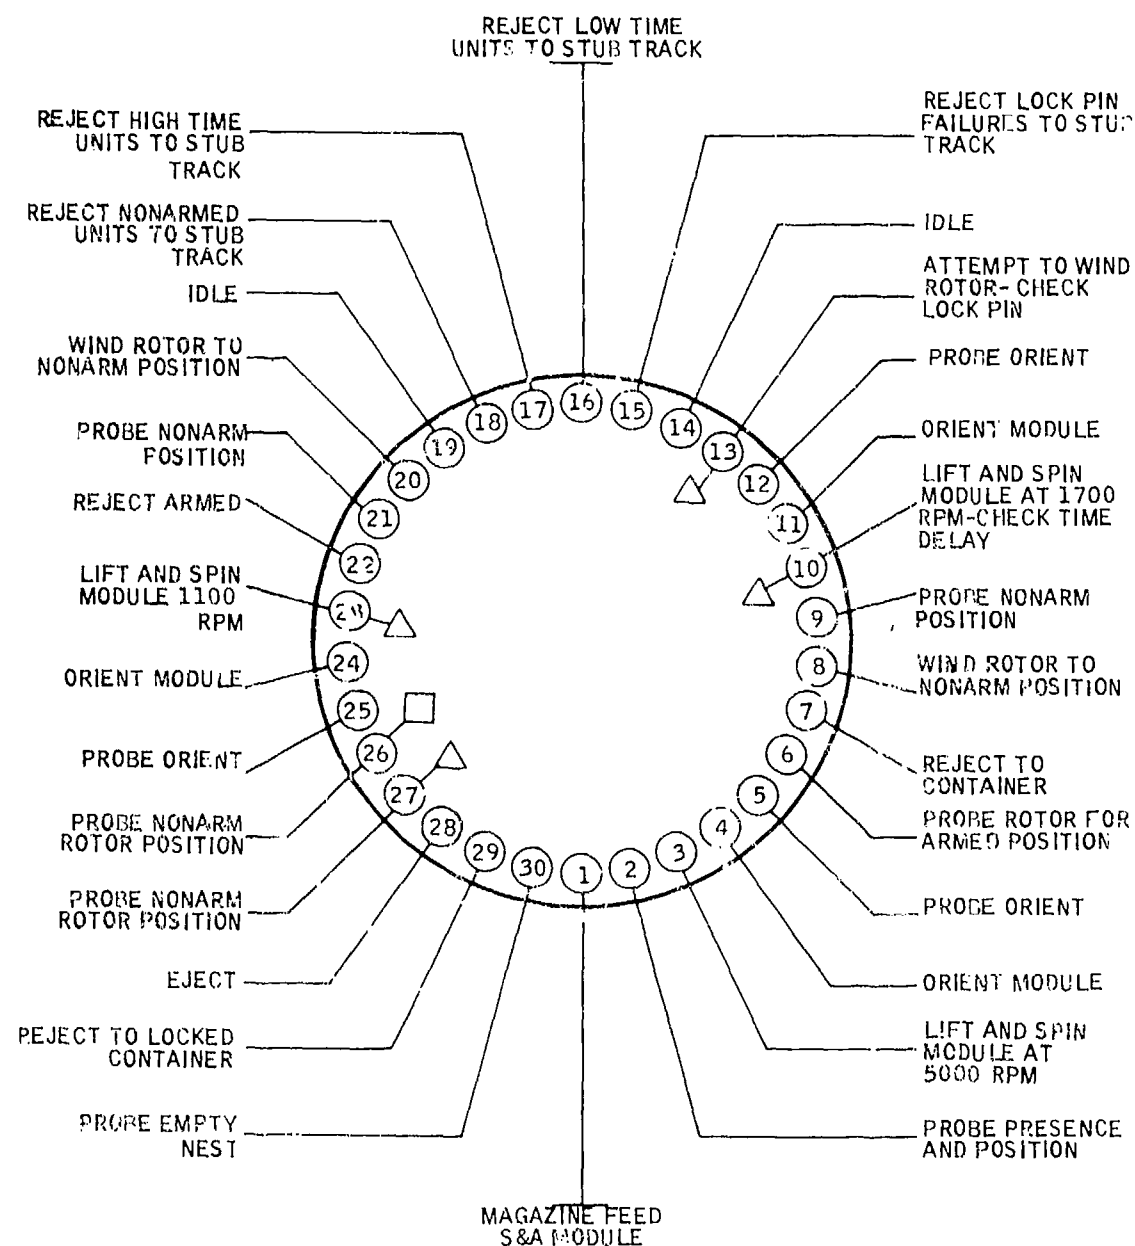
Dial schematic, machine S9 - S&A module assembly operation 1 (arm check)
